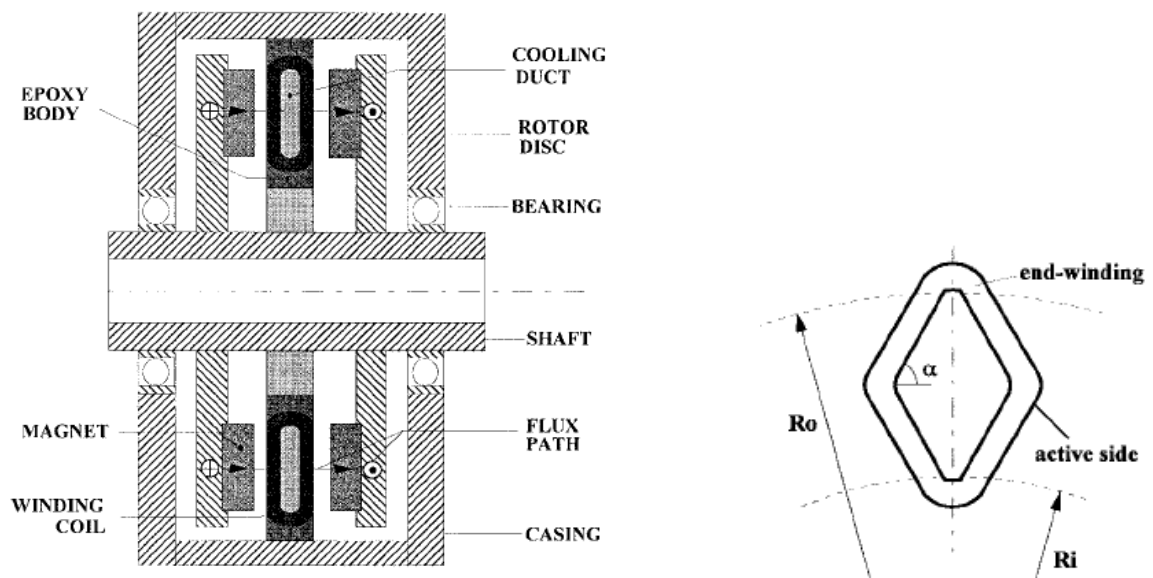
Double sided AFPM machine with air cored stator and two rotor disks having rhomboidal coils and rectangular PMs [82].
